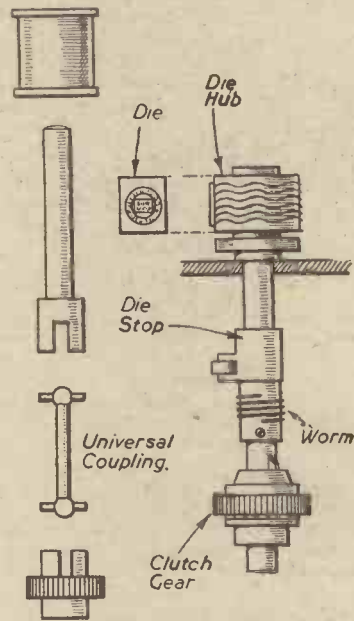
Showing an exploded view of a coupling, also the die hub spindle with cam and clutch.
